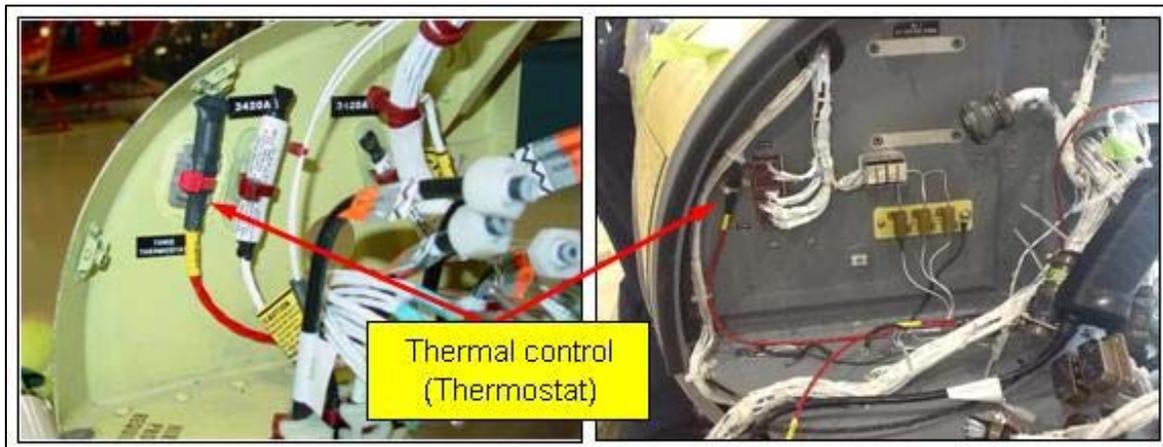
Examples of thermal control mounted with cable anchor TU02782 in battery compartment 6-18 inches / 15-45 cm from battery heat element, refer to instruction TN03046 and TN02782.
